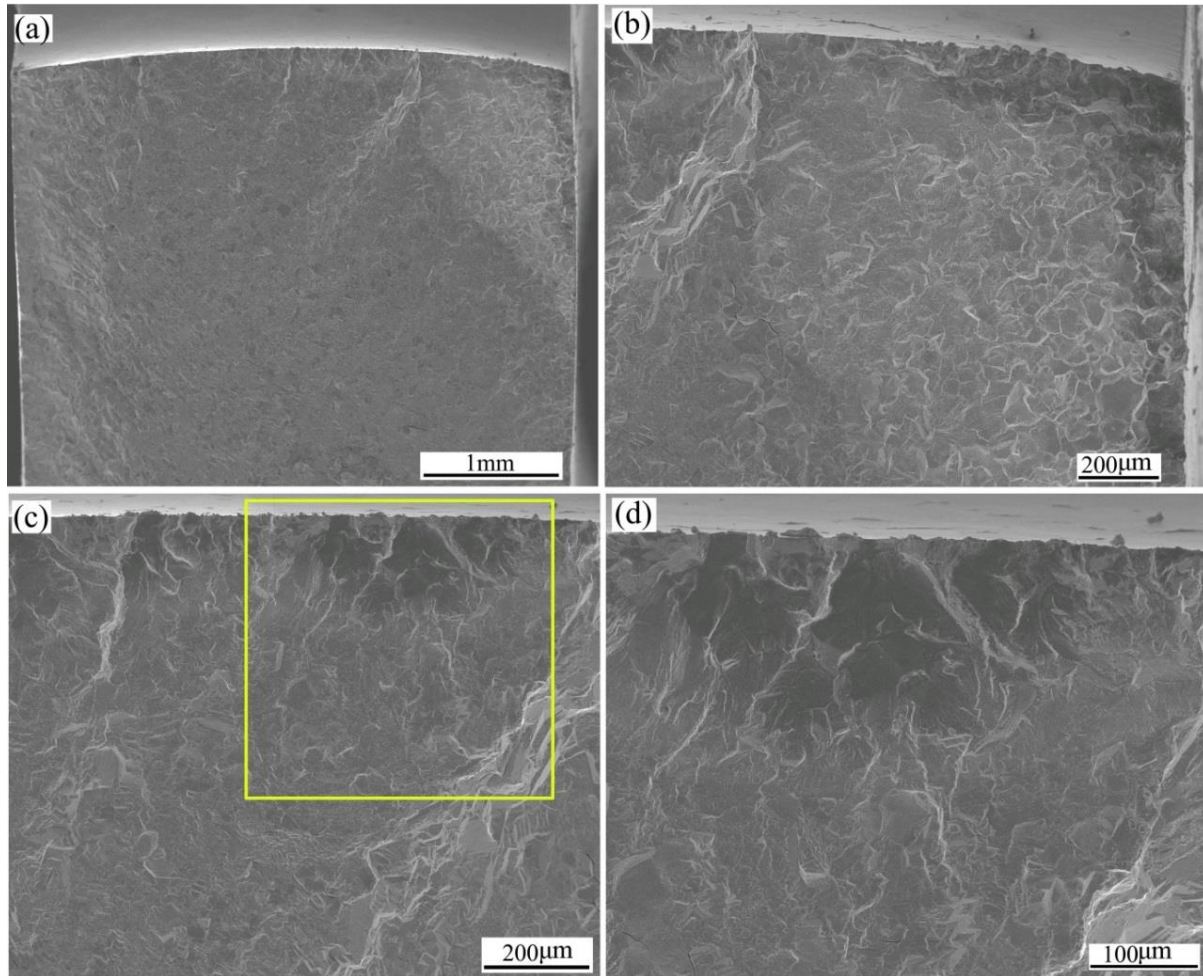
Fractography of the CG LSHR tested at 650 °C in air: (a) overall view of the fracture surface; (b) predominant intergranular fracture feature on the fracture surface at the corner crack; (c) morphology of intergranular crack initiation followed by mixed inter-transgranular and subsequent complete transgranular propagation and (d) higher magnification of the region highlighted in (c).
